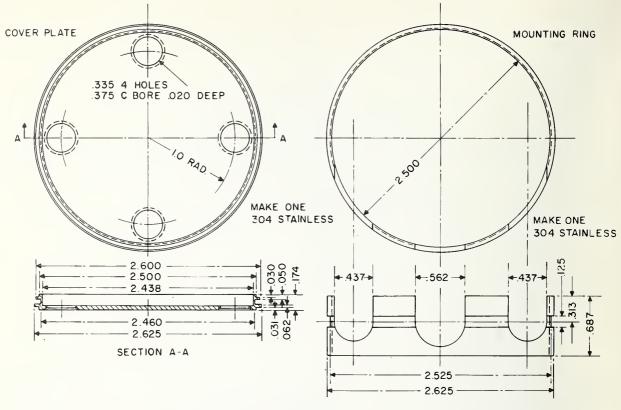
Mechanical drawings for the cover plate and mounting ring.
